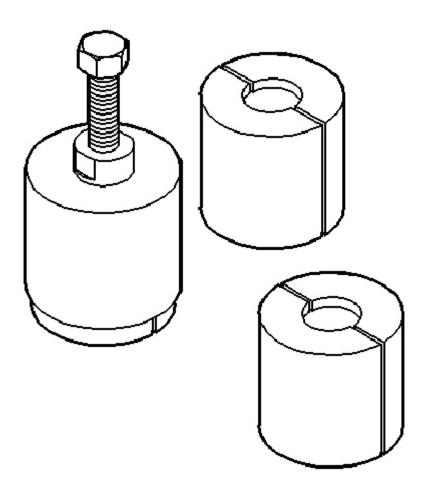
Puller Set 5048 Courtesy of CHRYSLER LLC
